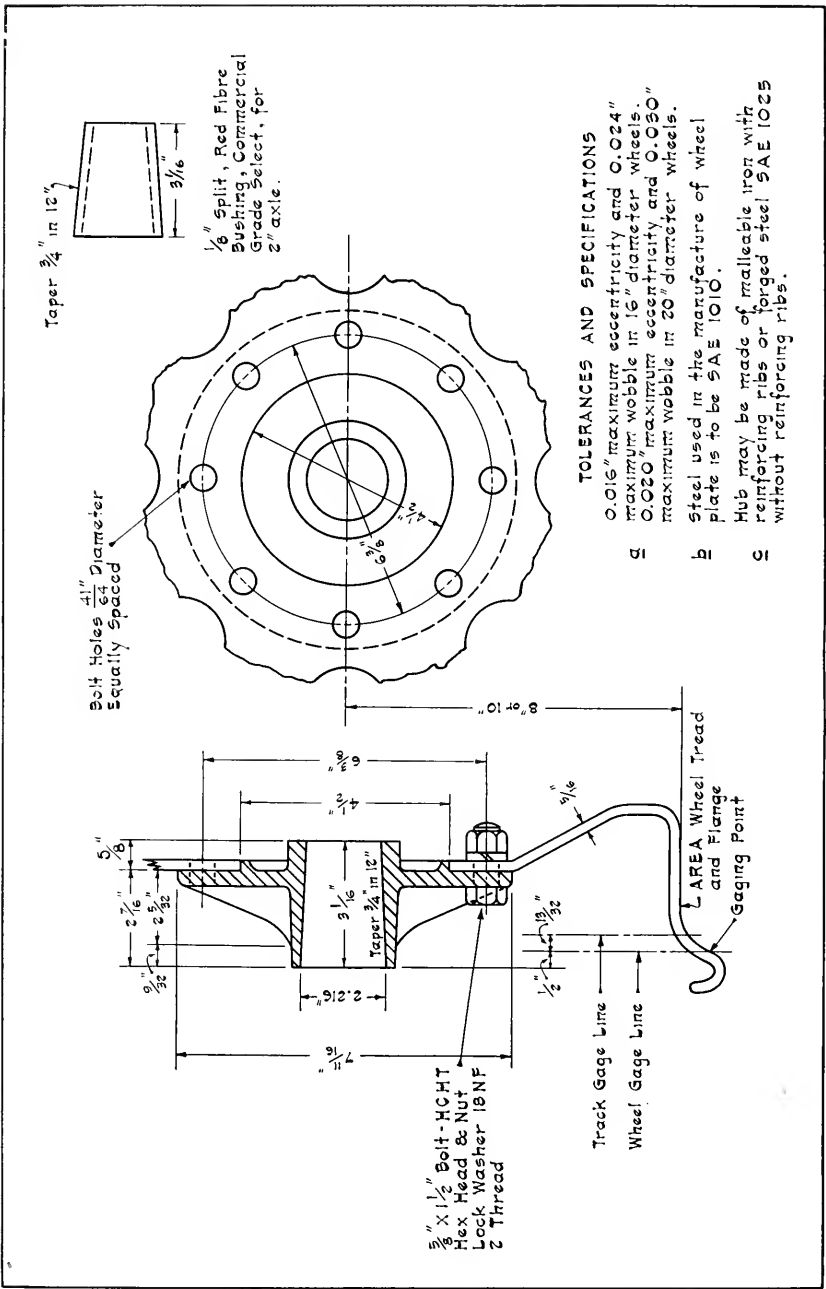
AREA 16-in and 20-in bolted, demountable-plate insulated wheel and bushing for motor cars, trailers and push cars using 2-in axles.
